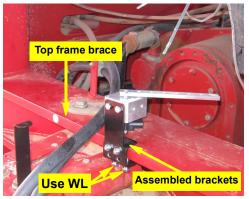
i: Installed brackets (see step 2d for WAS assembly installation)
